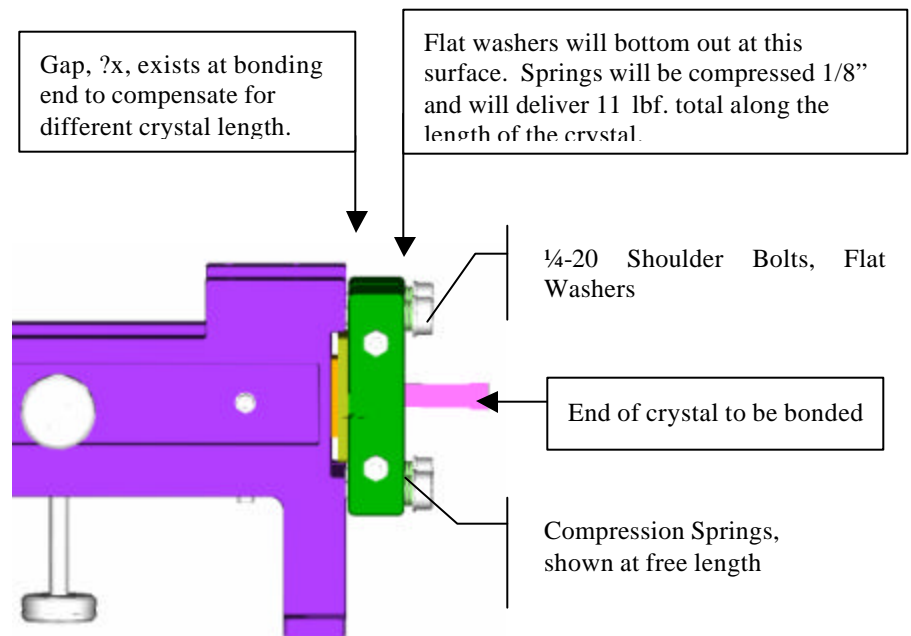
PN – B7340 Bond Set-up Assembly; Side View of Bonding End Shown
